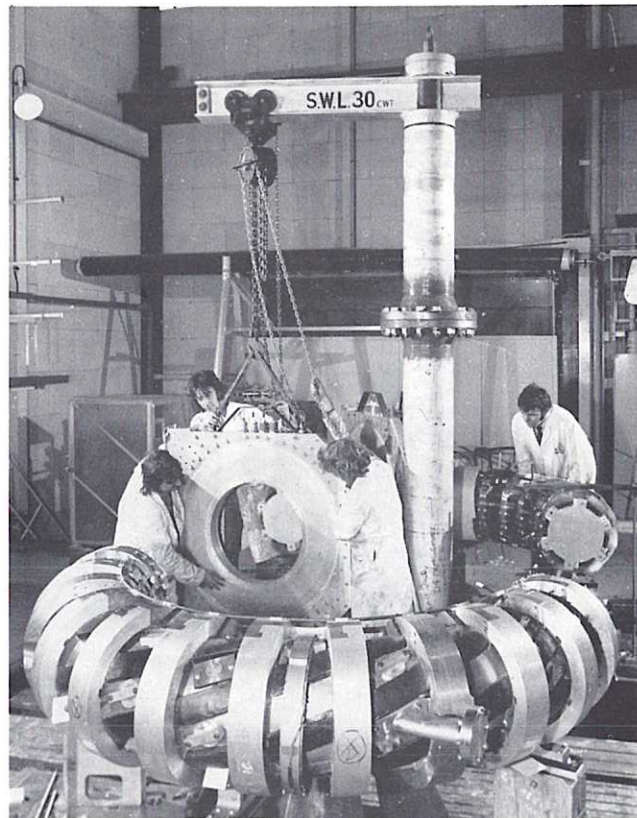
Installation of main field coils over the vacuum torus and helical winding assembly.
